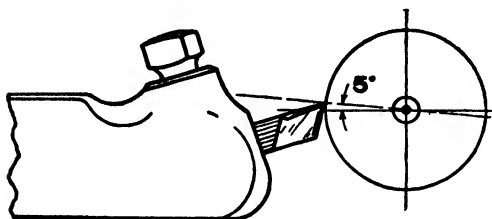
For straight turning, set the cutter bit about 5 deg above center. (South Bend Lathe Works)
